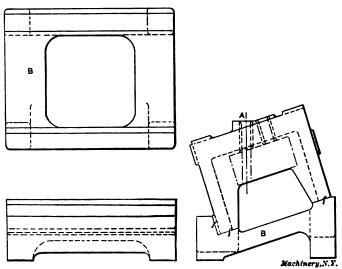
Jig and Stand for Drilling Holes at an Angle
